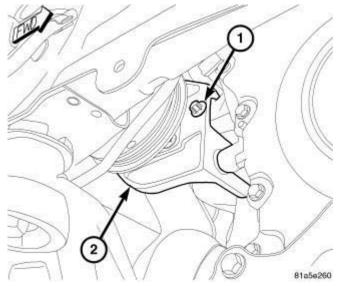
FRONT PUMP MOUNTING BRACKET BOLTS - 2.7L
